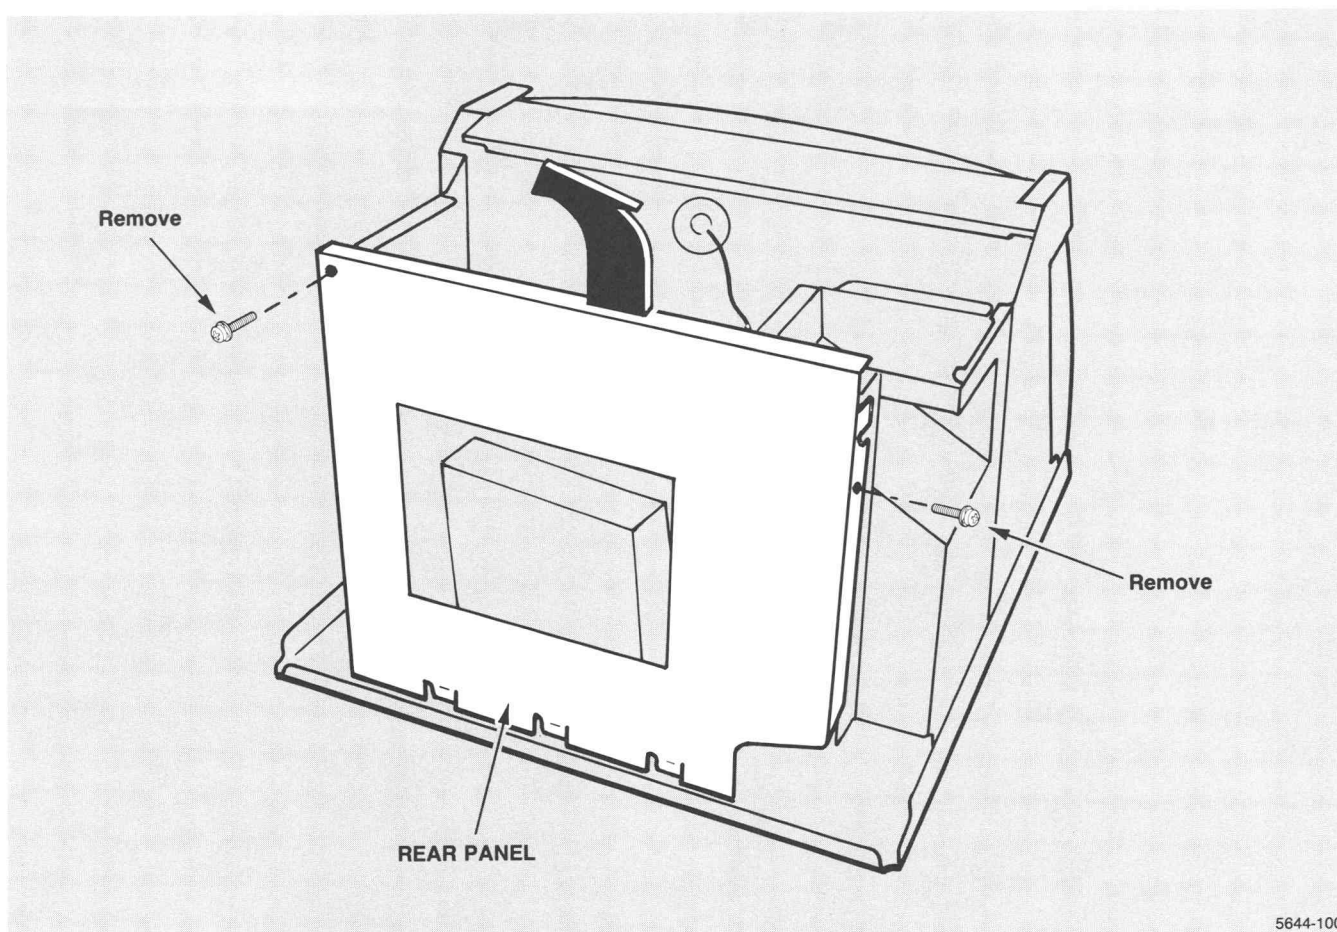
Removal of Display Module Rear Panel (119-2387-00).
